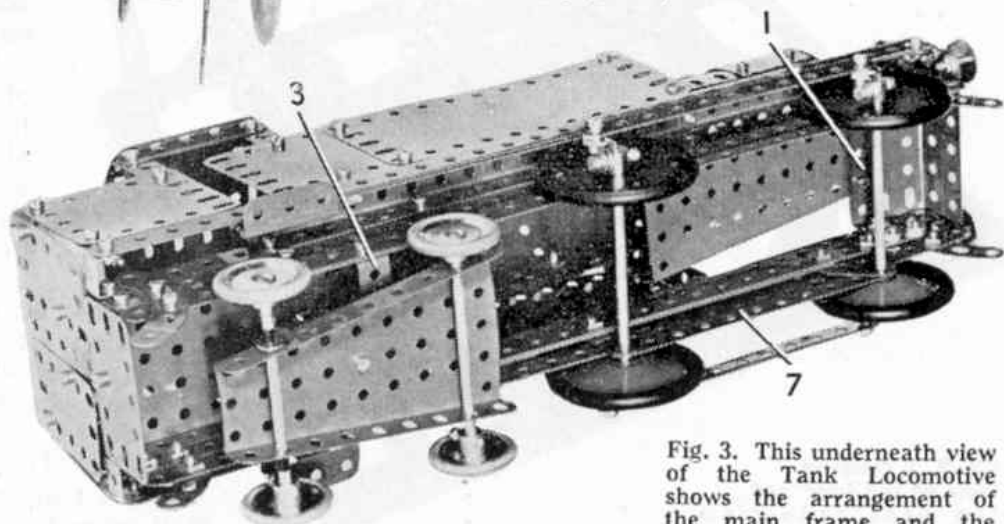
This underneath view of the Tank Locomotive shows the arrangement of the main axle frame and the axle bearings.
